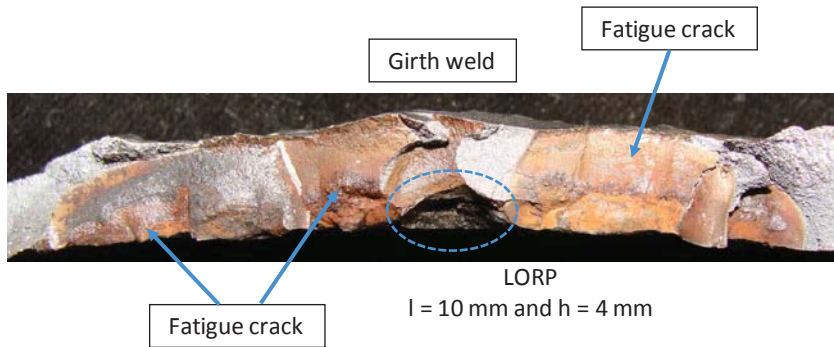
LORP defect of 10 mm x 4 mm and the fatigue crack profile transverse to the girth weld of vessel # 6-896 & 6-897 (number of cycles at leak = 292723 cycles).
